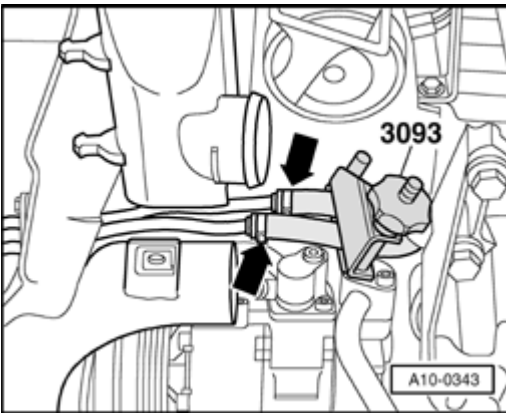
Using 3093 To Clamp Off Inlet And Outlet Pipe Of Cooling Coil For Power Steering Hydraulic Fluid
